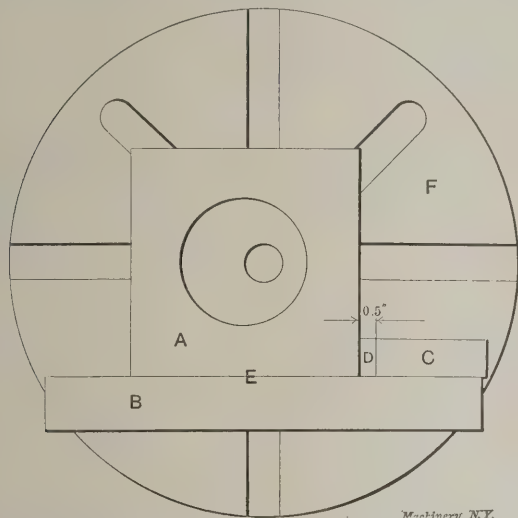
Method of Boring Fixture for Grinding Crankshaft.
